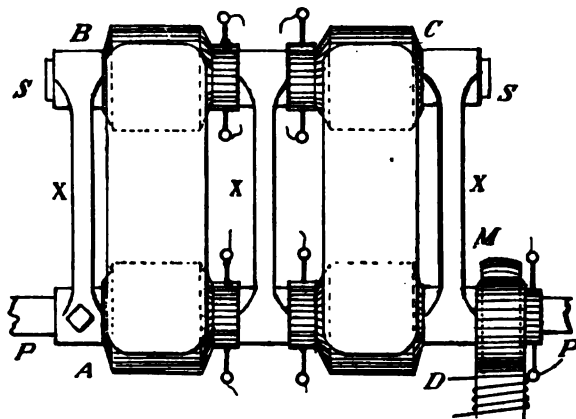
Double form of epicyclic electro-magnetic mechanism.
